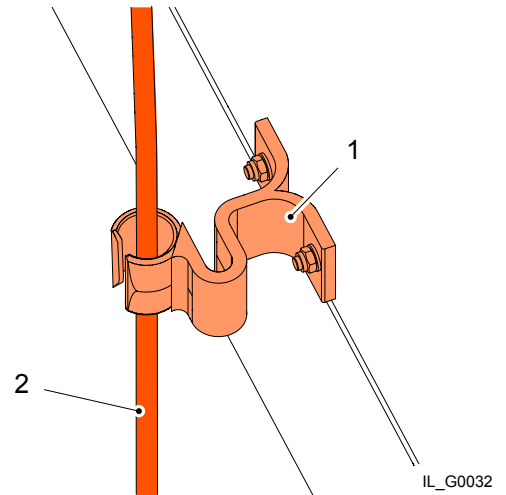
Passing the guiding wire ropes through the wire rope guides
